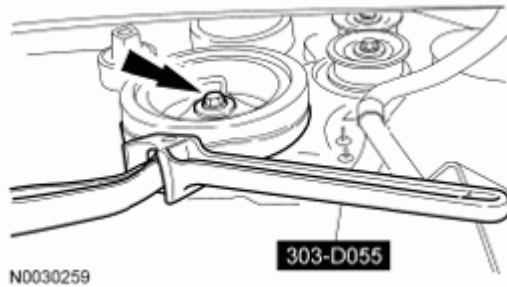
Holding Crankshaft Pulley Using Strap Wrench
